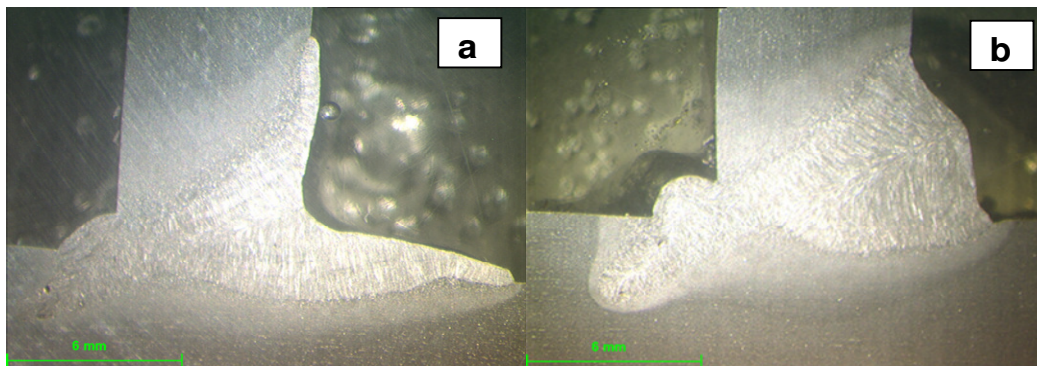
Effect of welding positioning on weld profile in hybrid laser at constant laser power, WFS and travel speed. (a) vertical, LP 7kW, WFS 12m/min and TS 1m/min (b) horizontal, LP 7kW, WFS 12m/min and TS 1m/min.
